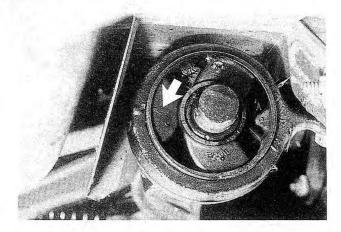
When correctly installed in mounting bracket, arrow on rubber bushing (arrow) is aligned with mark on bracket.
